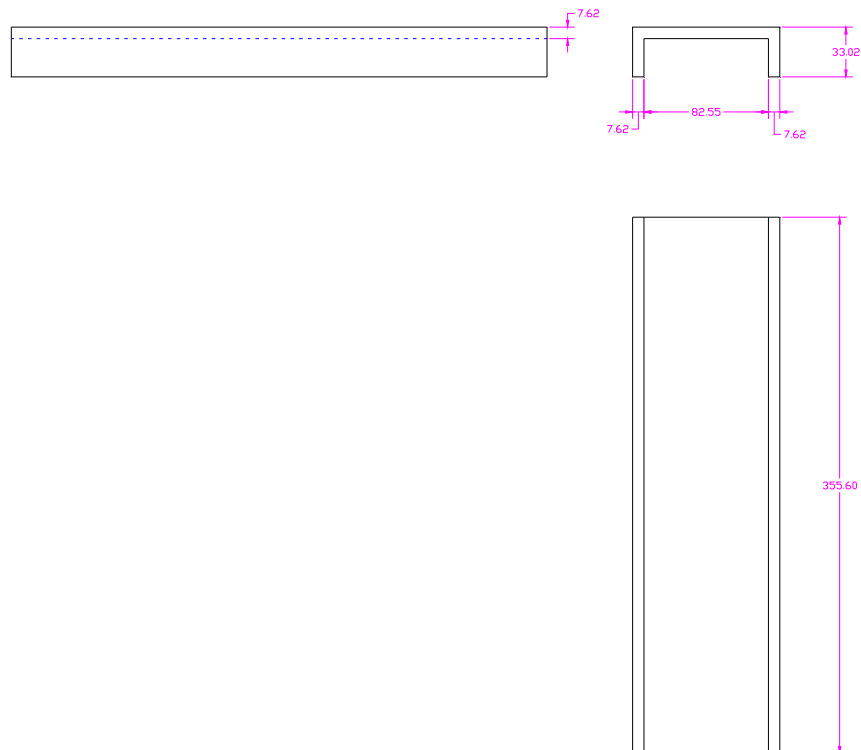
Design drawing for part #6, a total of two pieces (all values are in mm)
